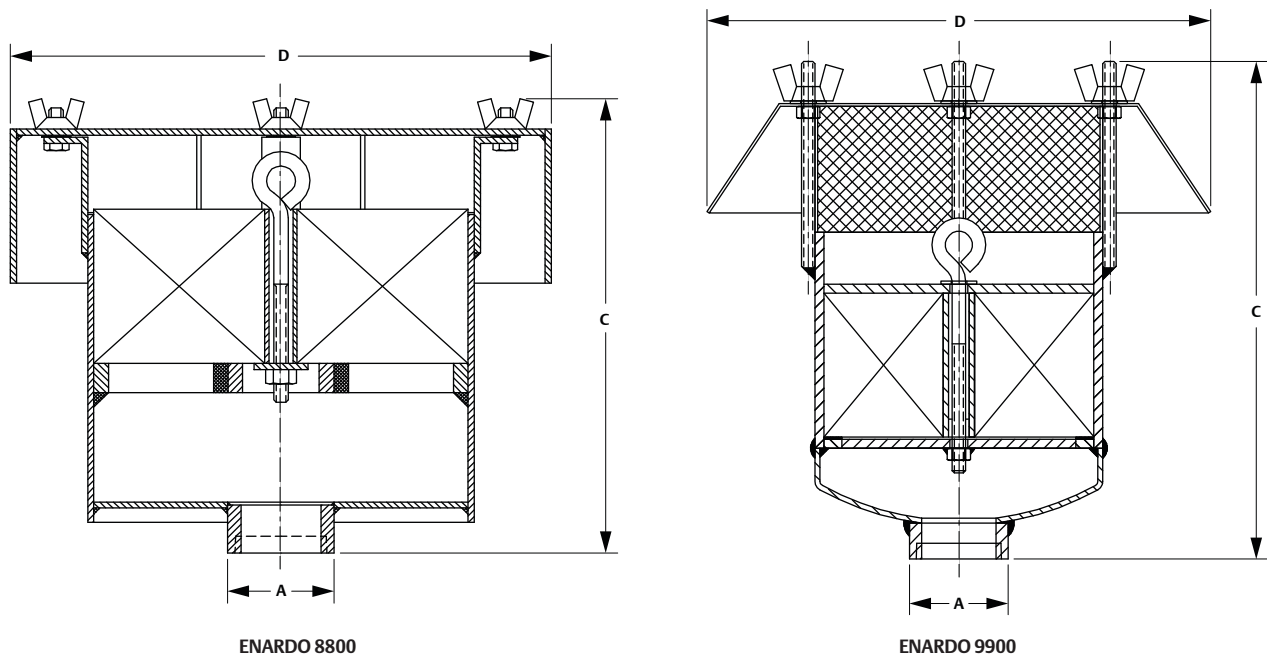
Enardo™ 8800 and Enardo 9900 Dimensions
